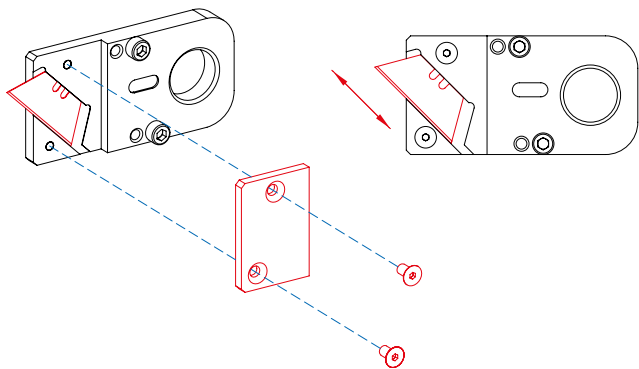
FIGURE D: Use the cutting head clamp system (D) if it is required to cut thick and tough materials by doing different passes.
